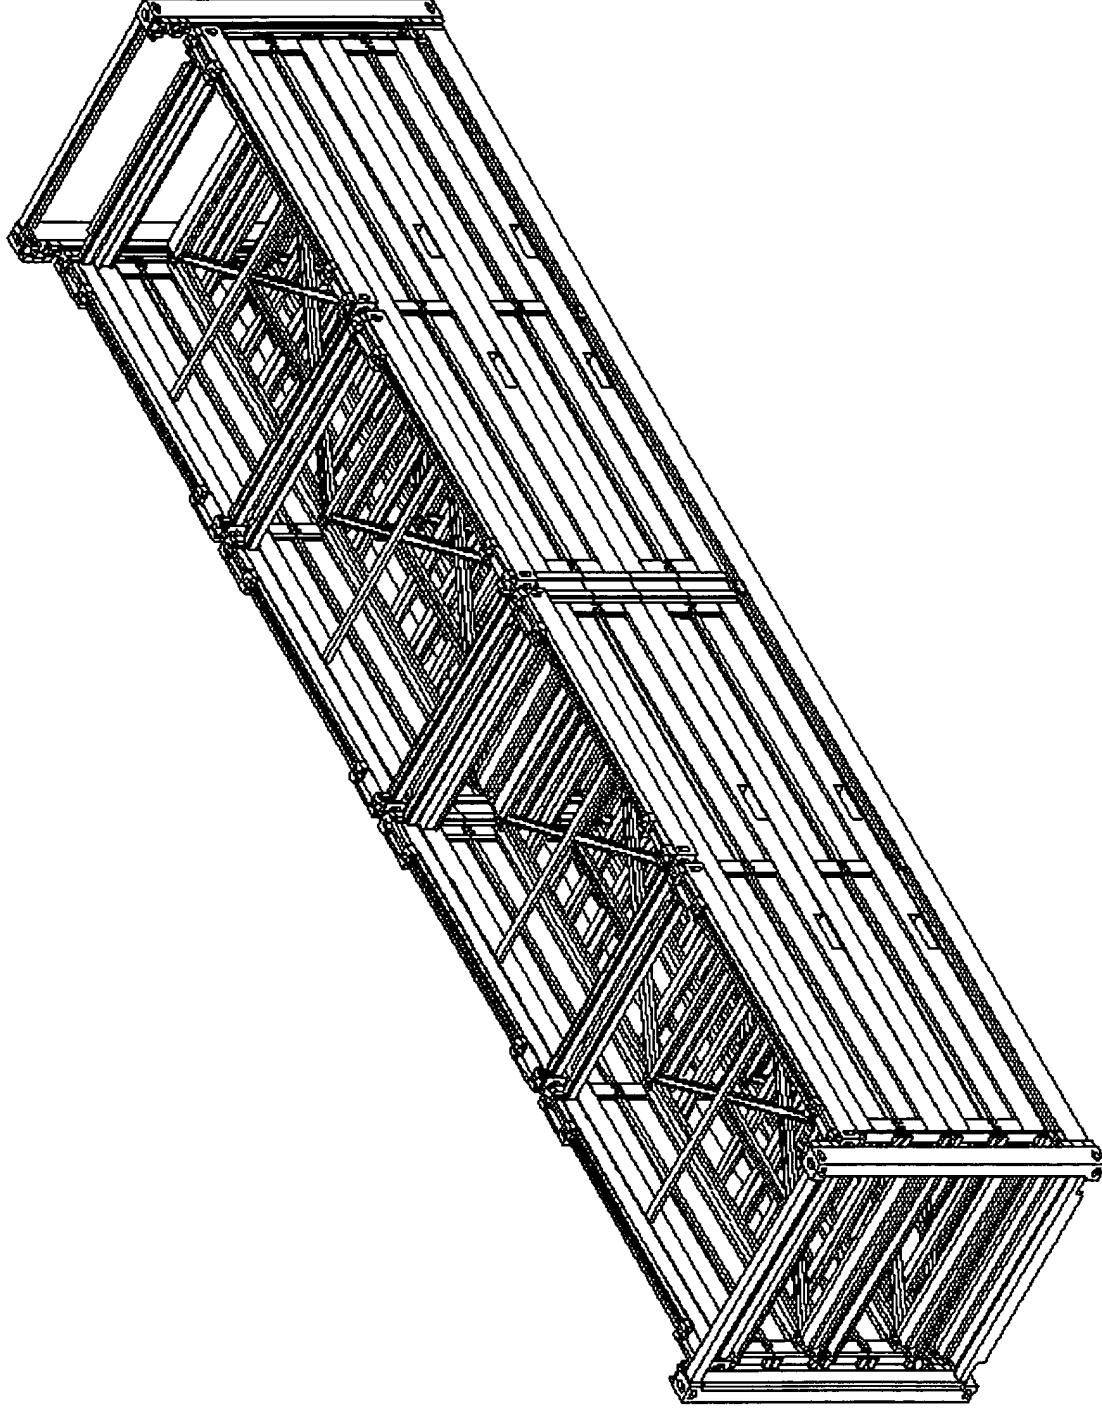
D: Step6 of disassemble and load process: The right frame of the 40 foot shipping collapsible cargo container is assembled.
